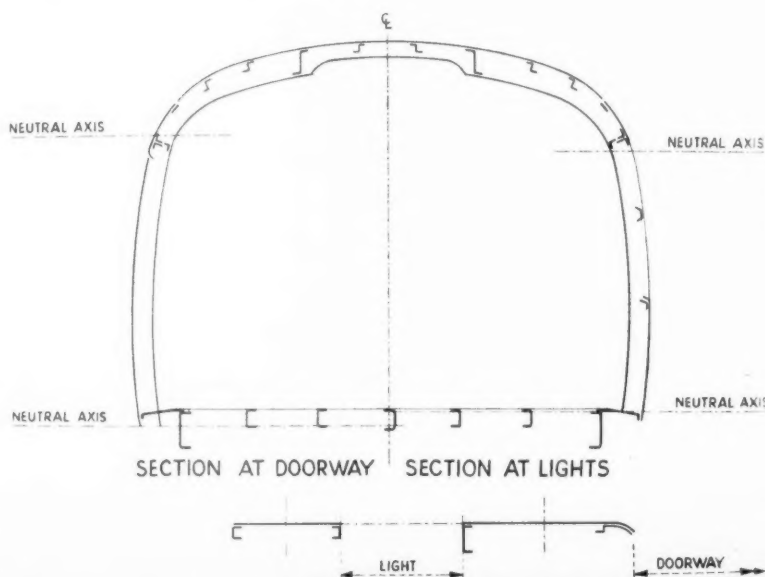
Diagram showing longitudinal load-carrying members of structure and typical pillar sections
